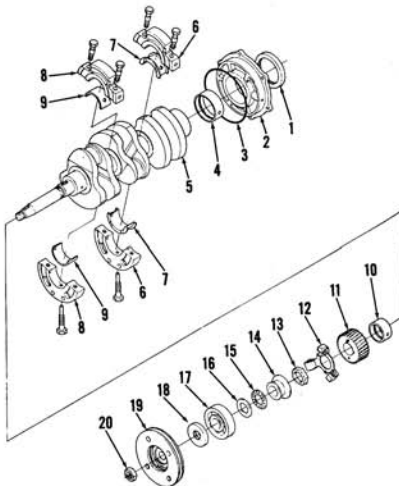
Exploded view of Model 3GM crankshaft assembly. Model 2GM and 3HM crankshaft assemblies are similar.
